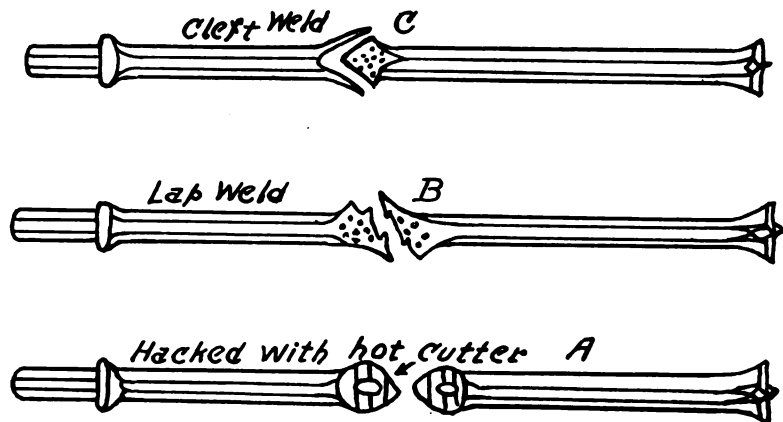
TO WELD SUCCESSFULLY THE STEELS MUST BE PROPERLY SCARFED
